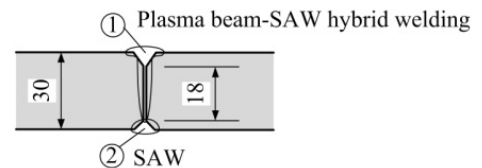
shows a summary of the intended improvement by reducing the needed weld preparation and weld passes for a plate thickness of 30 mm. If this welding sequence can be reached by the new procedure, the welding time will
